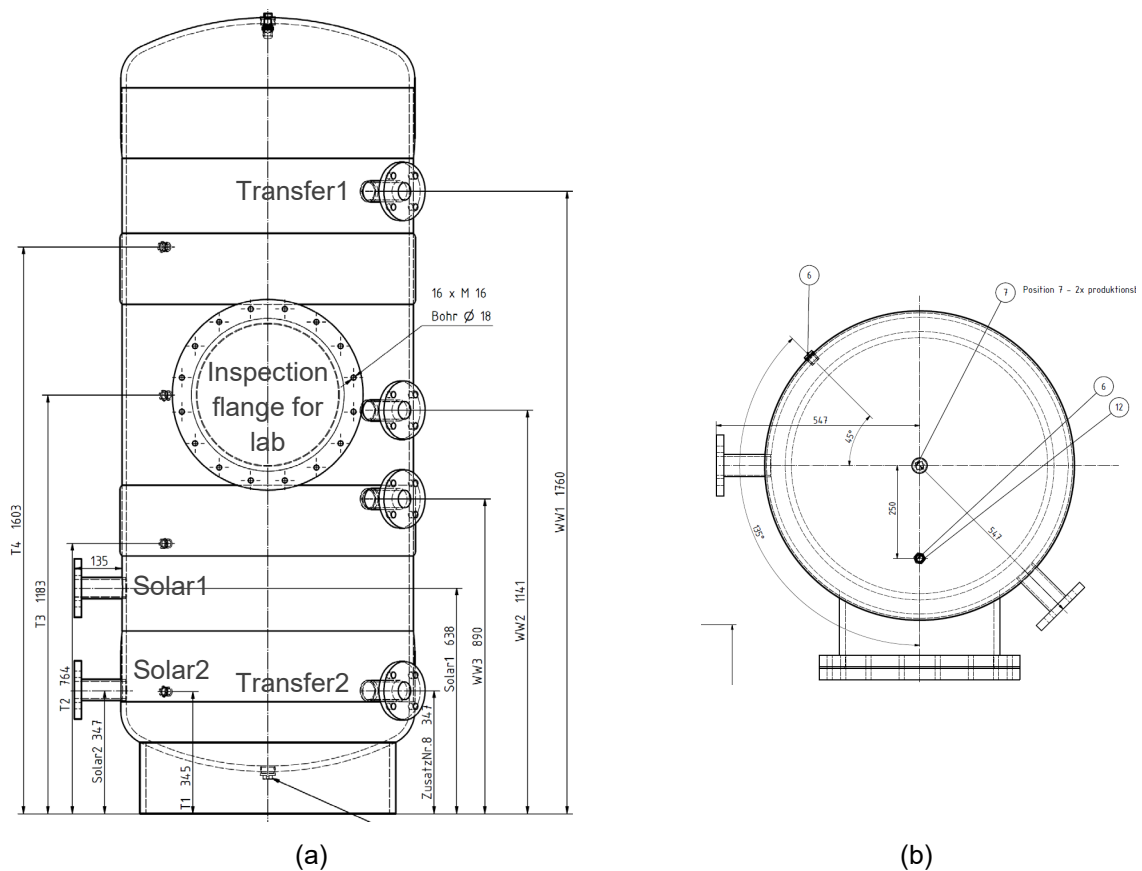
Drawing of the drainback storage with inspection flange to mount built-ins for the lab tests, a) side view with labelled connections for solar and transfer loop, b) cross section.
